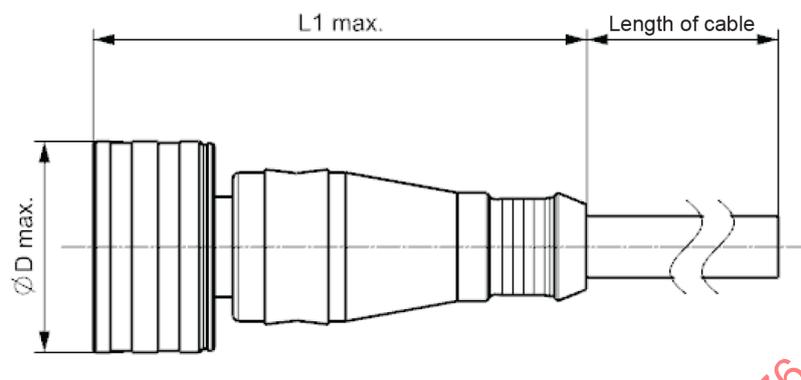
Non-rewireable connector, female contacts, straight version, with outer push-pull locking
